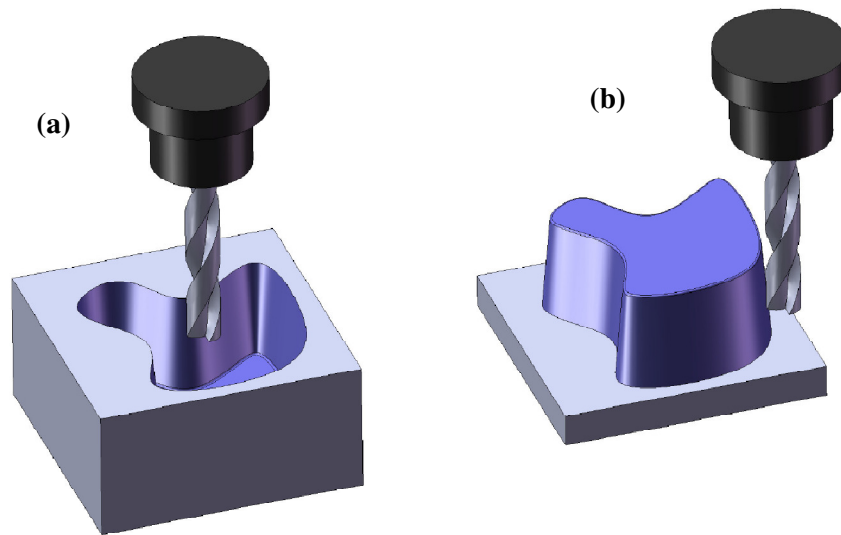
(a) Pocket milling and (b) island milling, both accessible using three-axis mills
